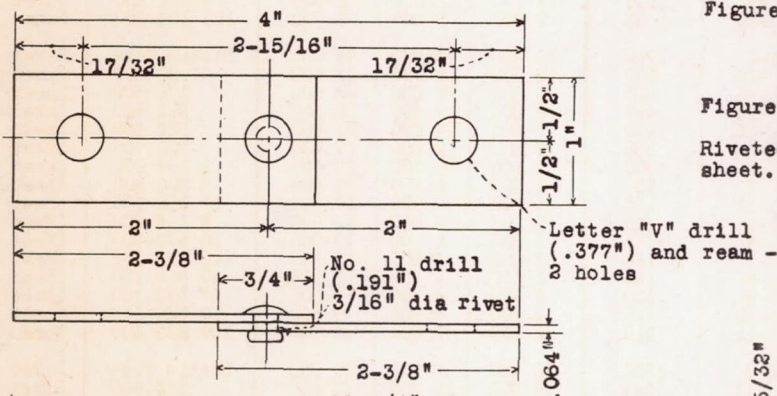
Rotating beam fatigue machine specimen detail. Riveted specimen of 14 gage (.064") sheet.
